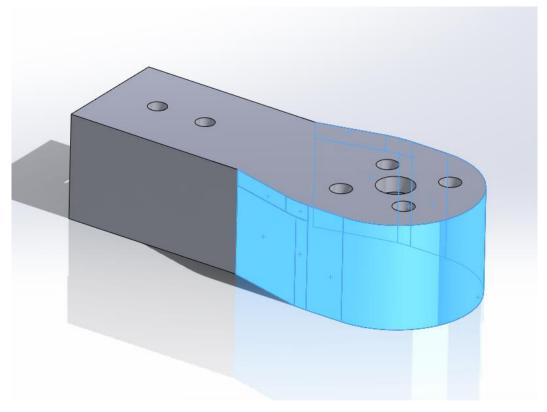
Innovated motor holder CAD model, the front part is highlighted blue
